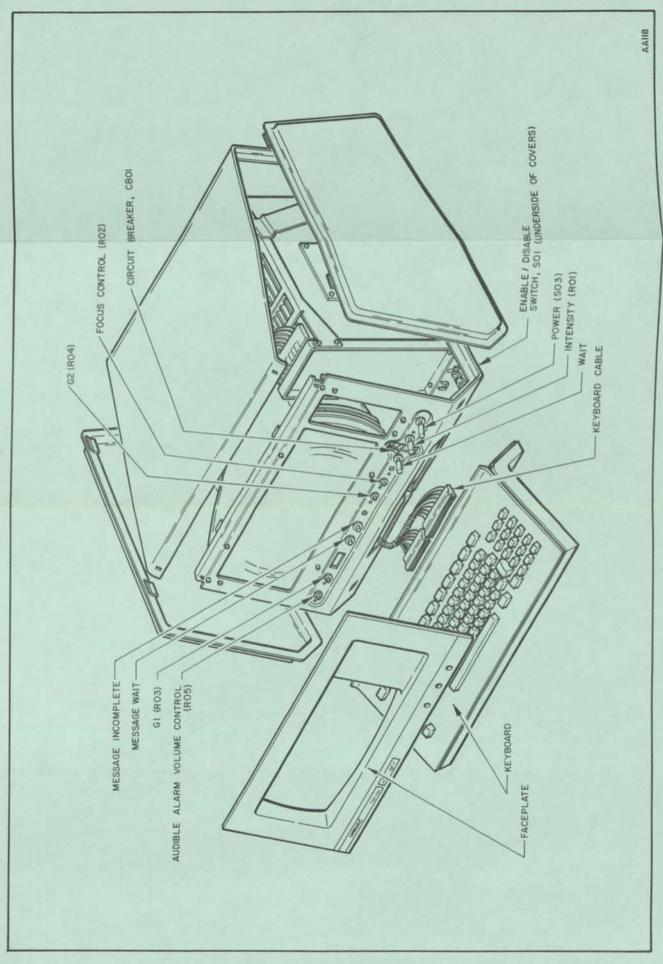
UNISCOPE 100 Display Terminal Cover Removal
